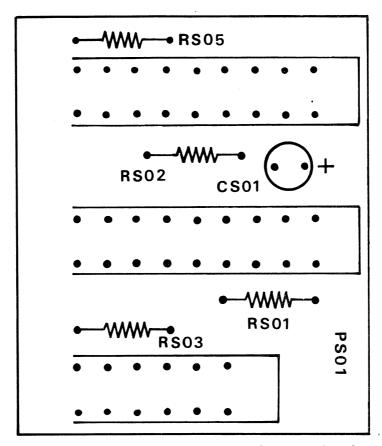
Selector Push Switch Assembly PS01 Component Locations
